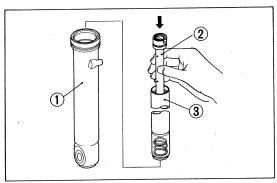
① Front fork bottom pipe ② Bottom pipe ③ Fork pipe
